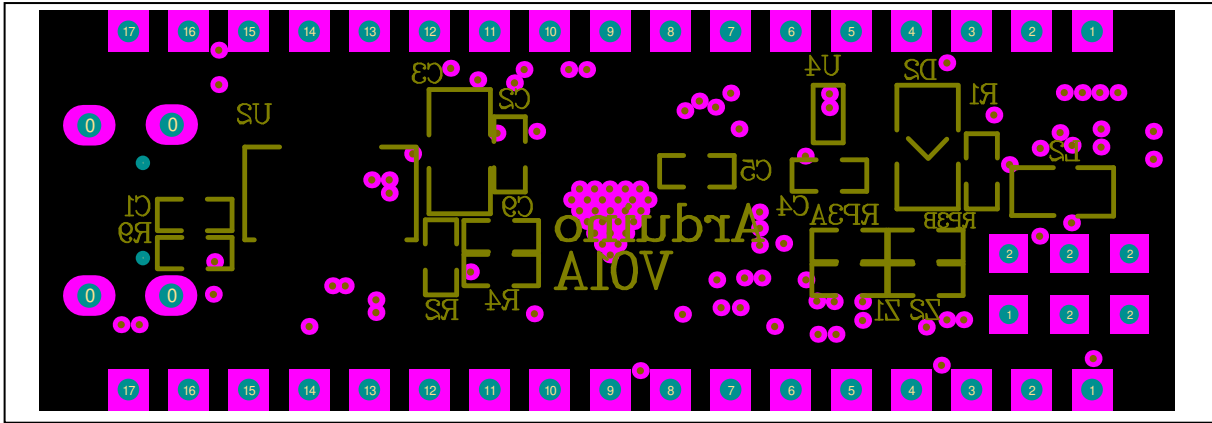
Arduino Board Component Placement Guide - Bottom Layer
